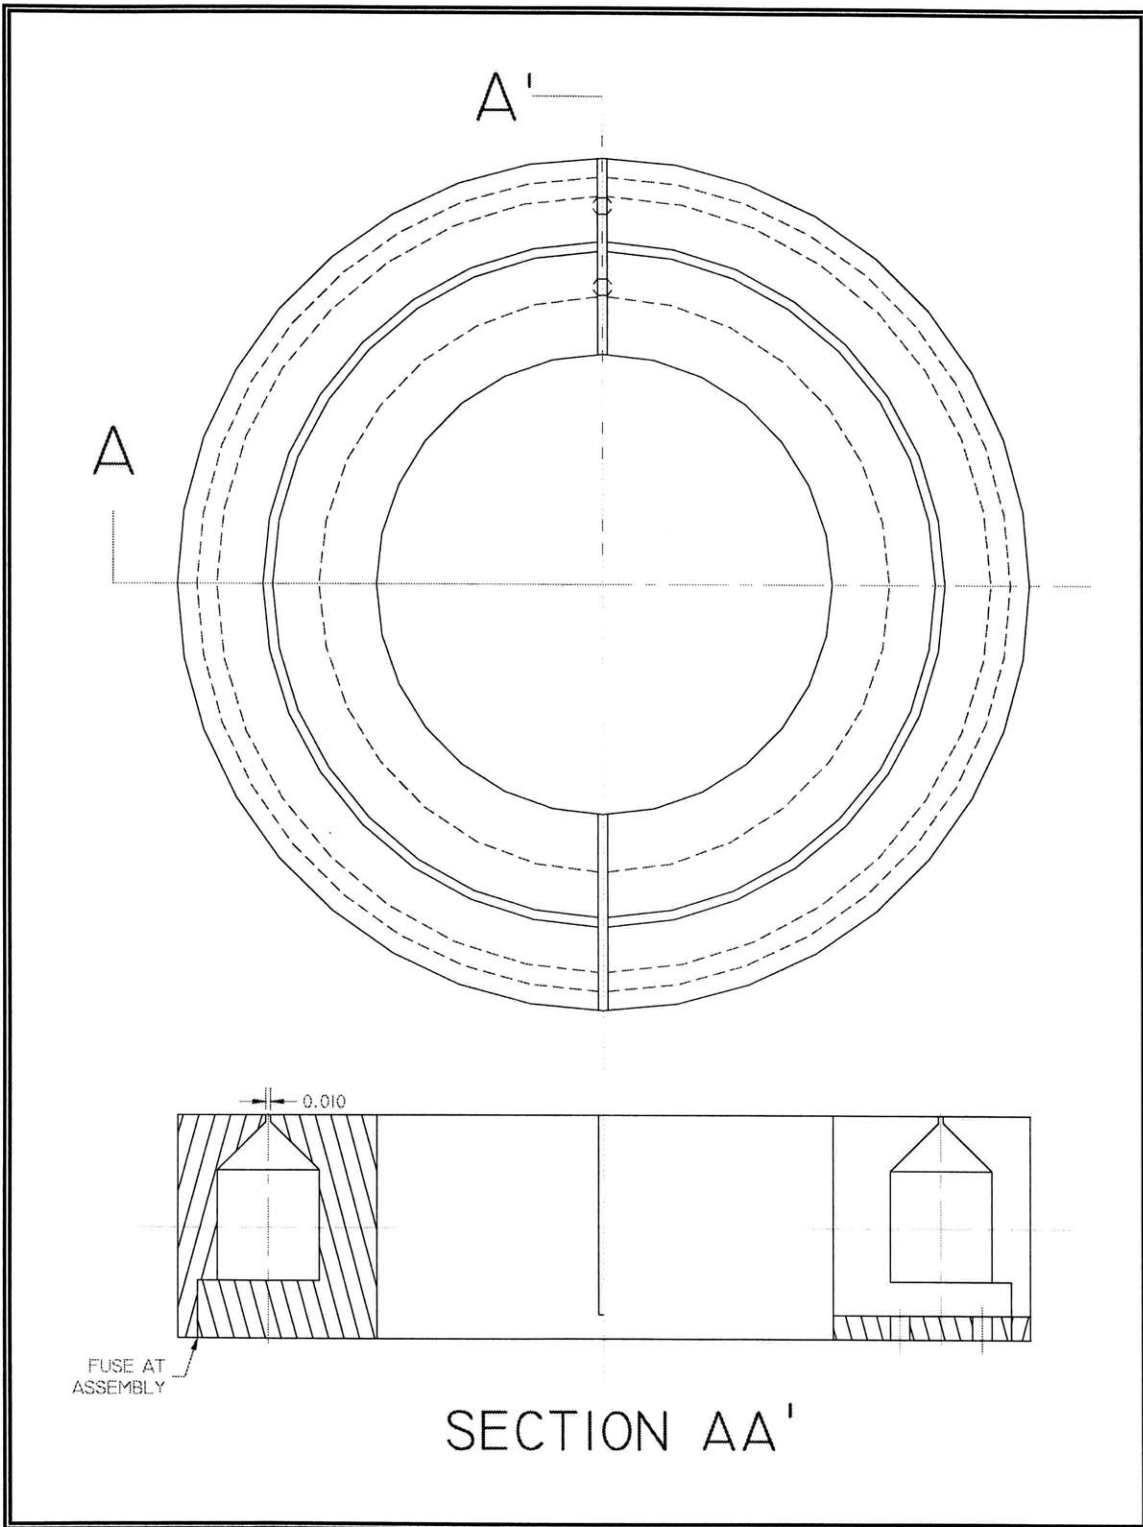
The outlet valve yoke is constrained to a 0.96-inch inner diameter because during its stroke, the expander piston travels through the outlet valve's center
